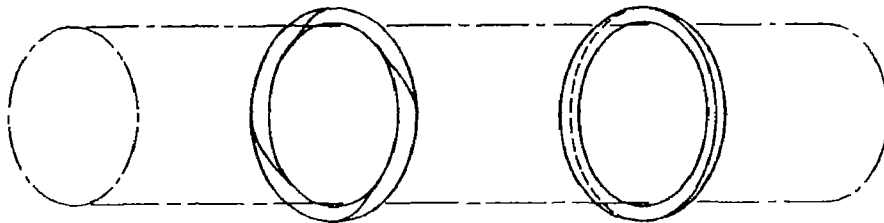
Twisted and untwisted O-rings, as shown by molding die marks (parting lines) on O-ring surface.
